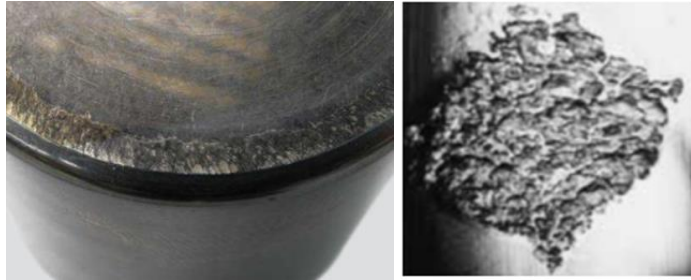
Different morphology defects: adhesive wear (left) and fatigue damage (right) [85]
